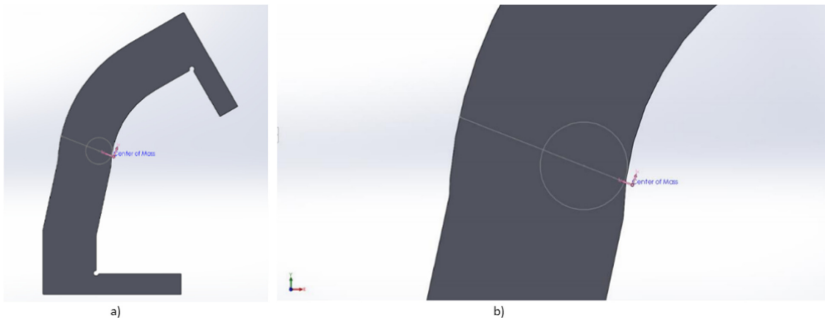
Convex shape workpiece: a) Center of mass outside the cut shape b) enlarged view
